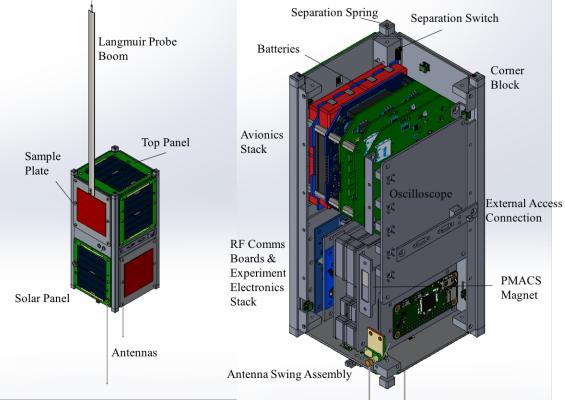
Exploded view of the 2U SurfSat CubeSat, showing key components, including deployable elements and exterior-mounted components.
